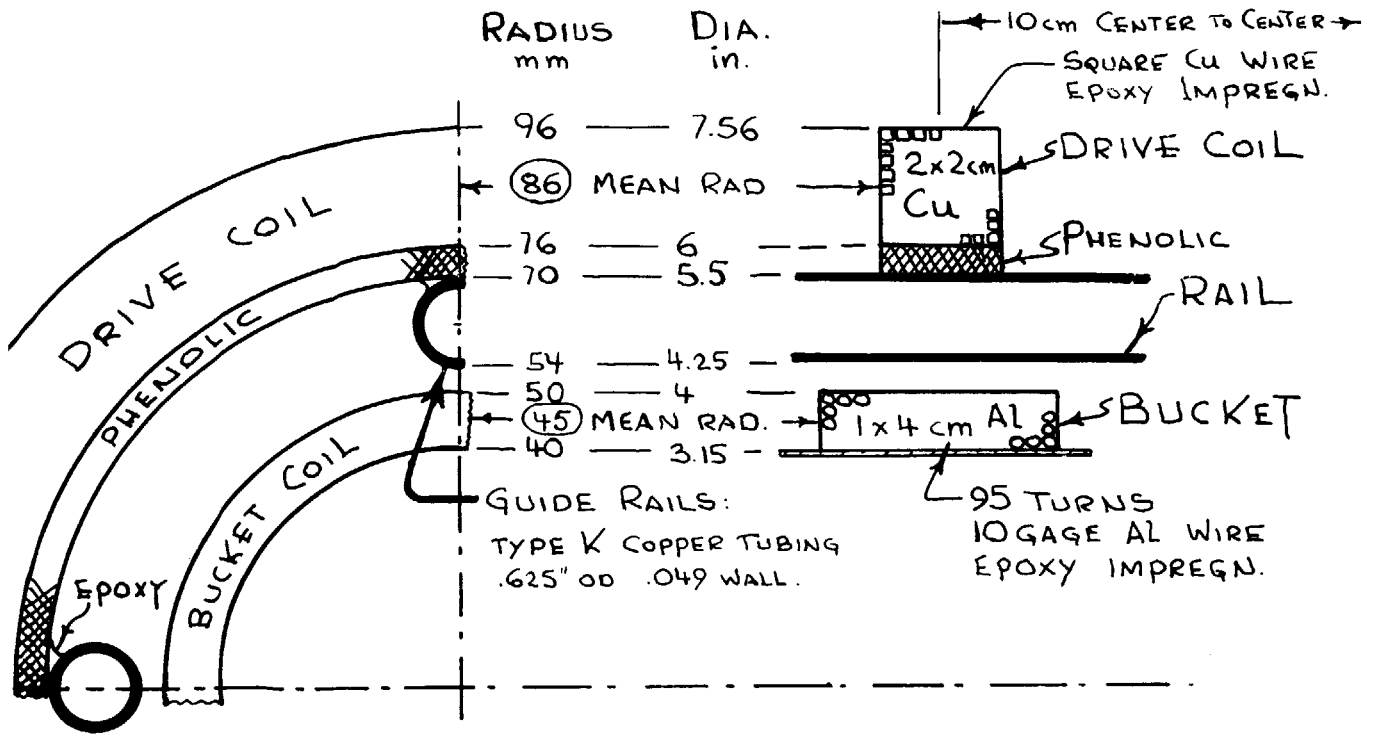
Dimensions of the basic four-inch caliber coaxial mass driver (Drawing from Ref. 4).
